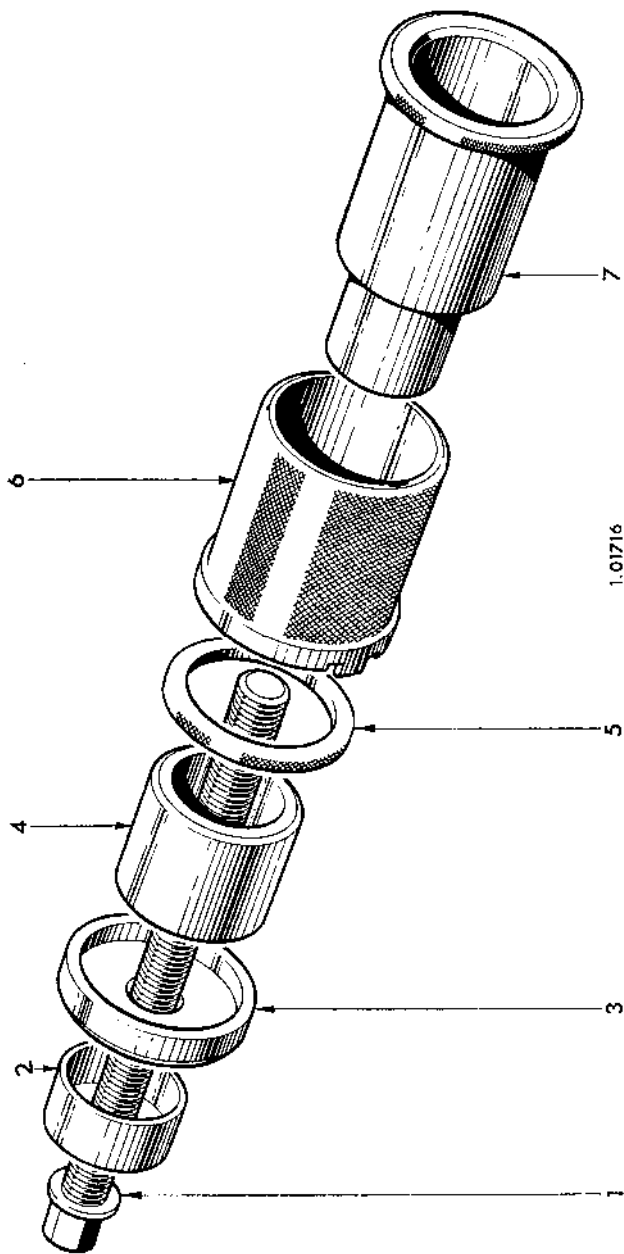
Main Bearing Tool Complete — Part No. 317-84
